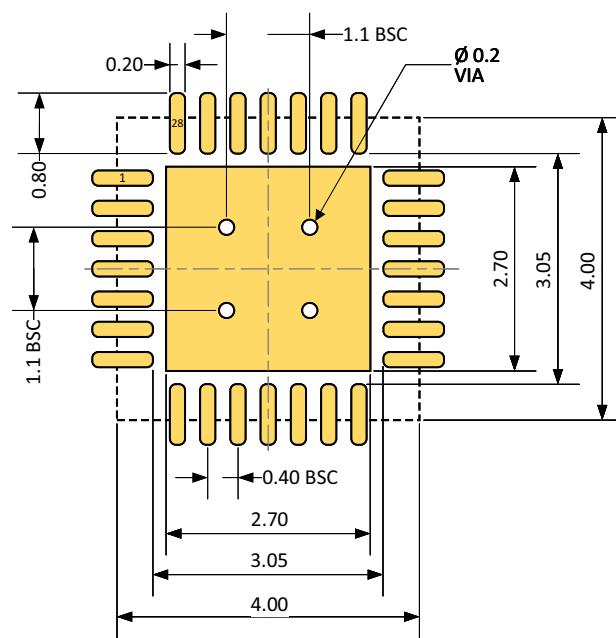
Recommended board layout for QFN 28-pin 4x4mm (all dimension in mm)
